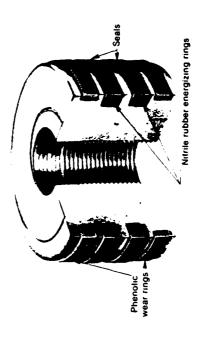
FILLED PTFE PISTON-RING SEALS REPLACING LIP SEALS AND METALLIC PISTON RINGS
